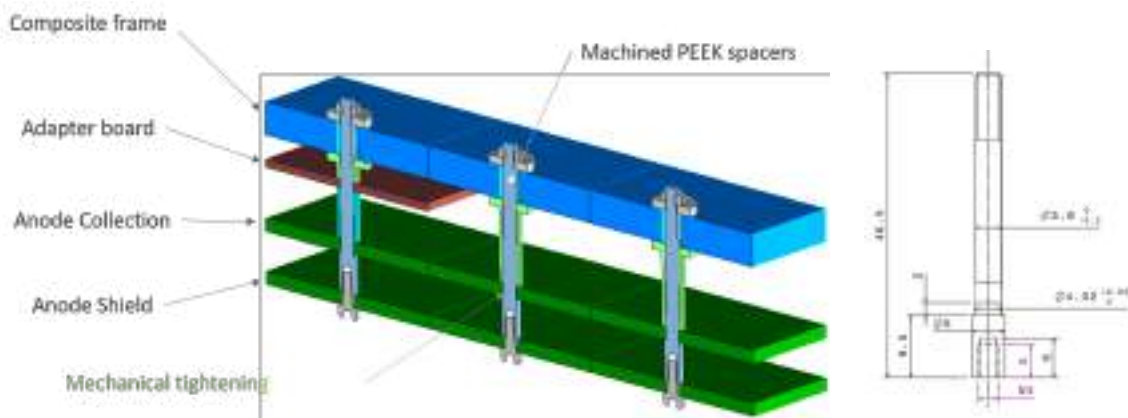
Details of the different spacers (light blue and light green) and attachment screws used to link the two anode layers and the adapter boards to the composite frame.
